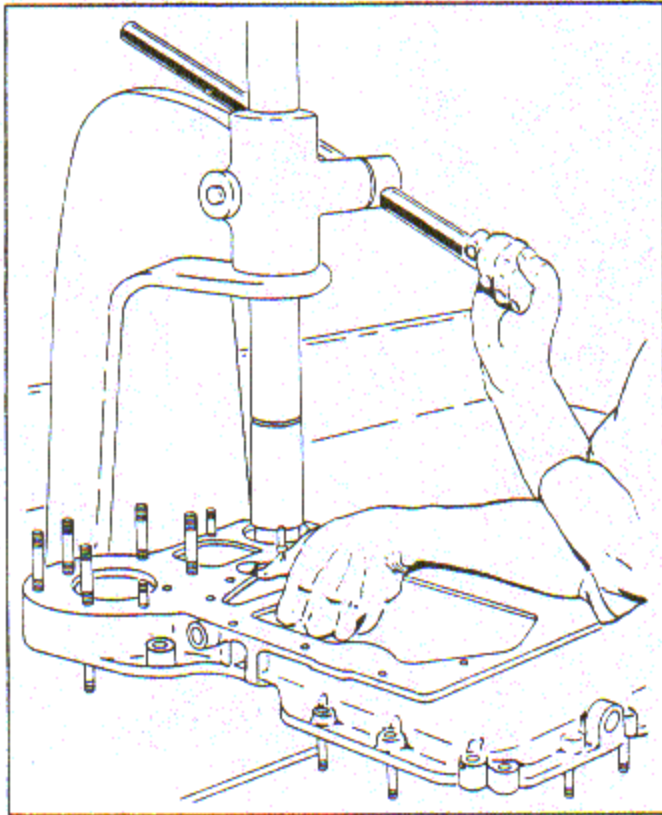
Installing Upper Hydraulic Pump Drive Oil Seal
